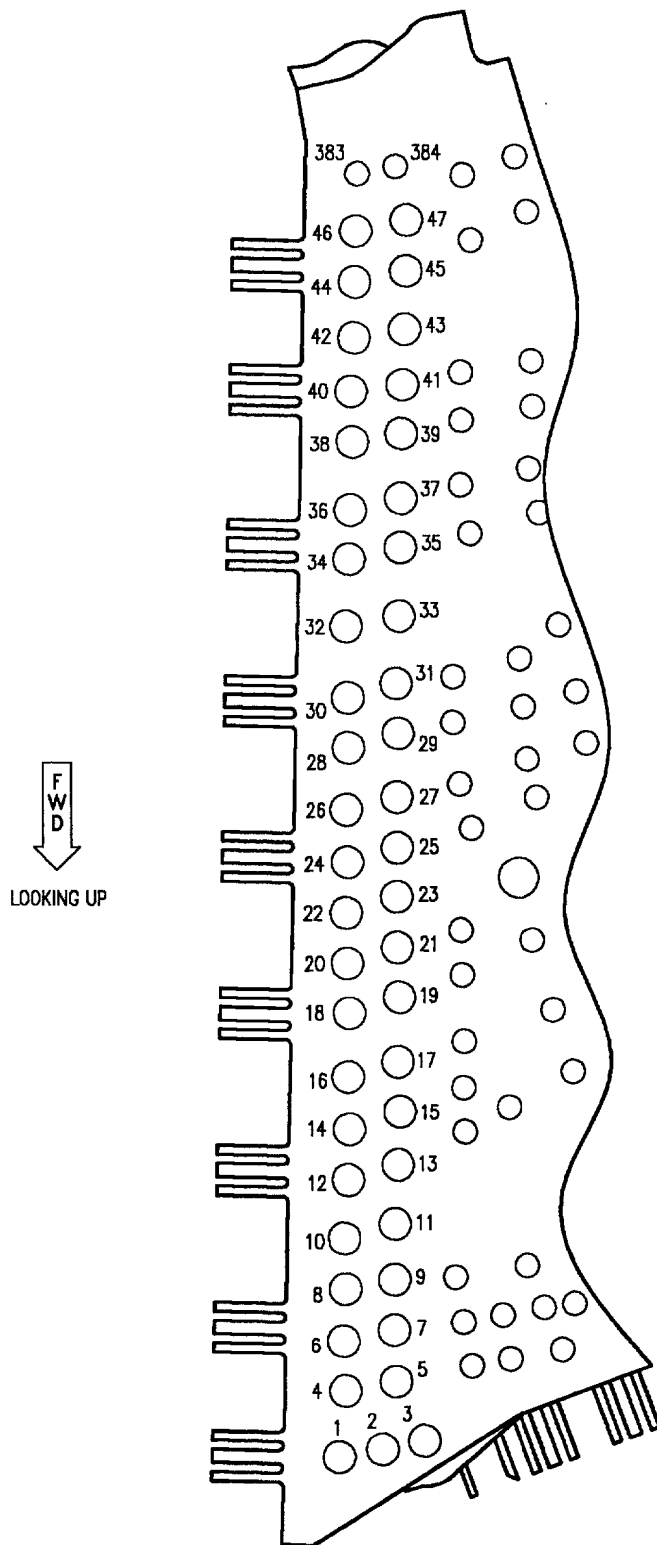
Wing Fold Rib, Lower Fasteners (Sheet 1)
